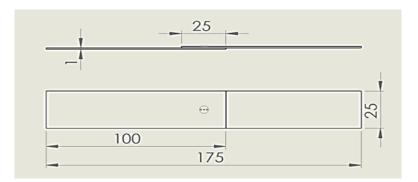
The dimensions of the used specimens (all dimensions in mm)
